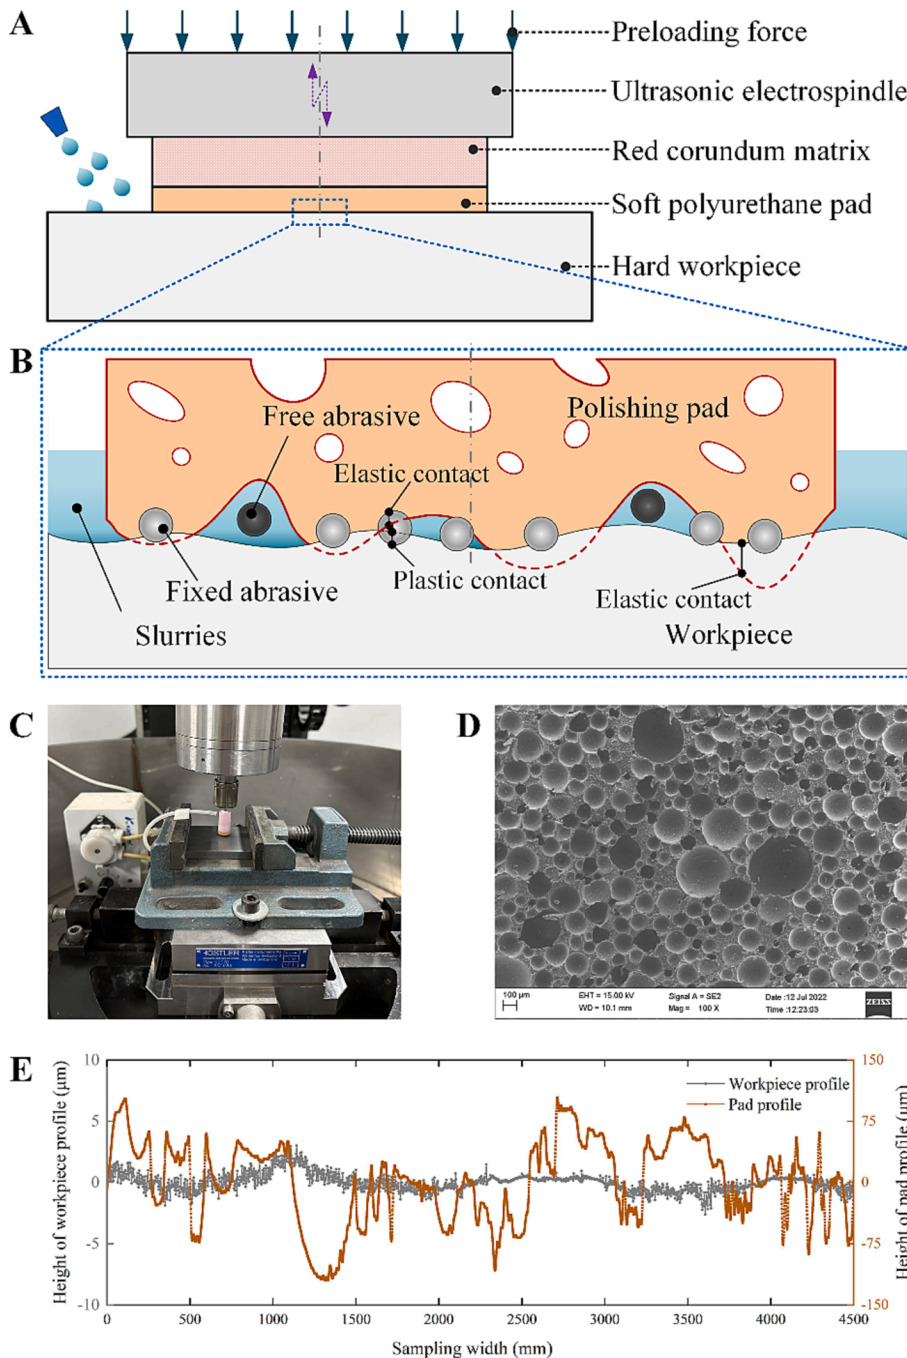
Two-dimensional schematic (A) and actual experimental setup (C) of ultrasonic polishing system; contact states (B) of fixed and free abrasive particles between soft polishing pad and hard workpiece; microscopic morphology (D) of polishing pad; the surface profile (E) of the as-received workpiece and polishing pad.
